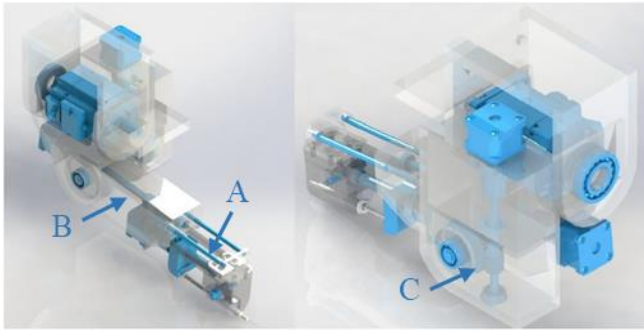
Design of 3-DOF puncture needle manipulator with ball-screw drive and worm drive.
